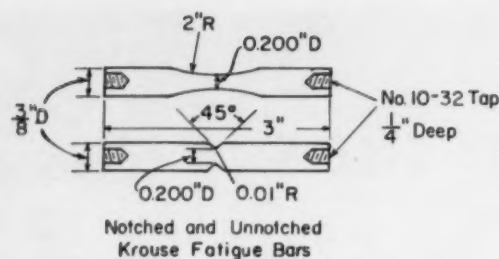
Drawings of fatigue bars and tensile test bar used.
